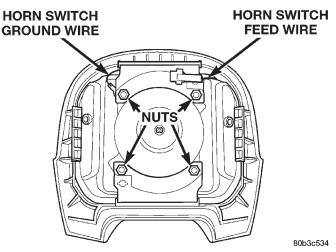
Driver Side Airbag Trim Cover Retainer Nuts Remove/Install
